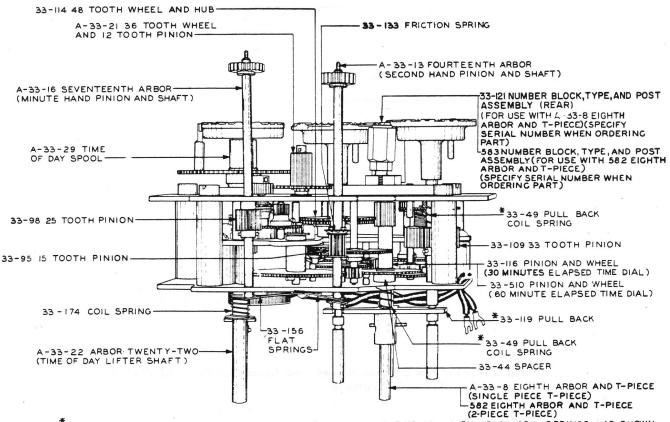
Platen Holder — Including Parts of Clock Mechanism
